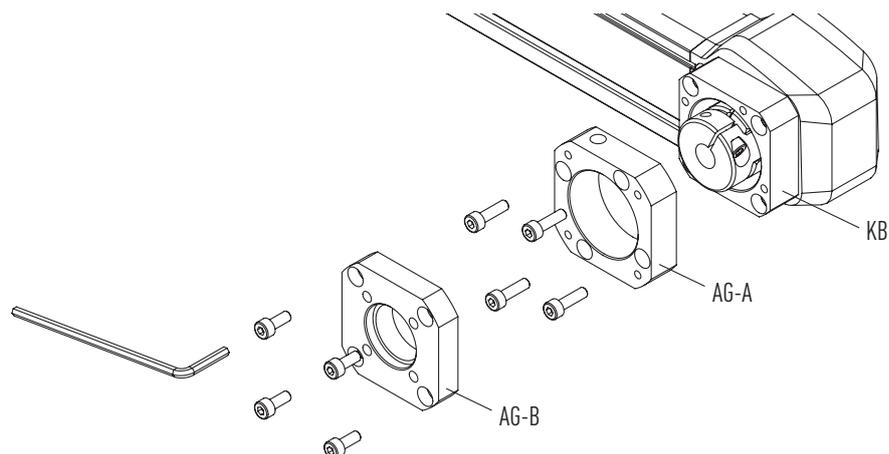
Mounting the two-part gear adapter plate AG-A and AG-B – HM040B
